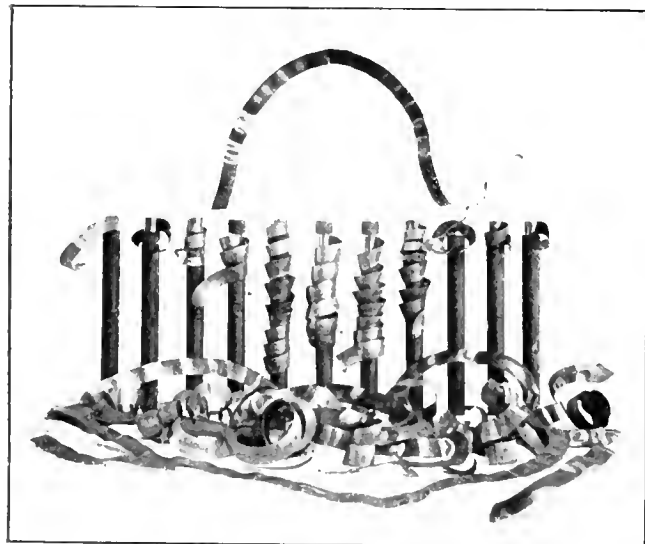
Example of "Chip" Produced in Heavy Cross-feed Grinding
